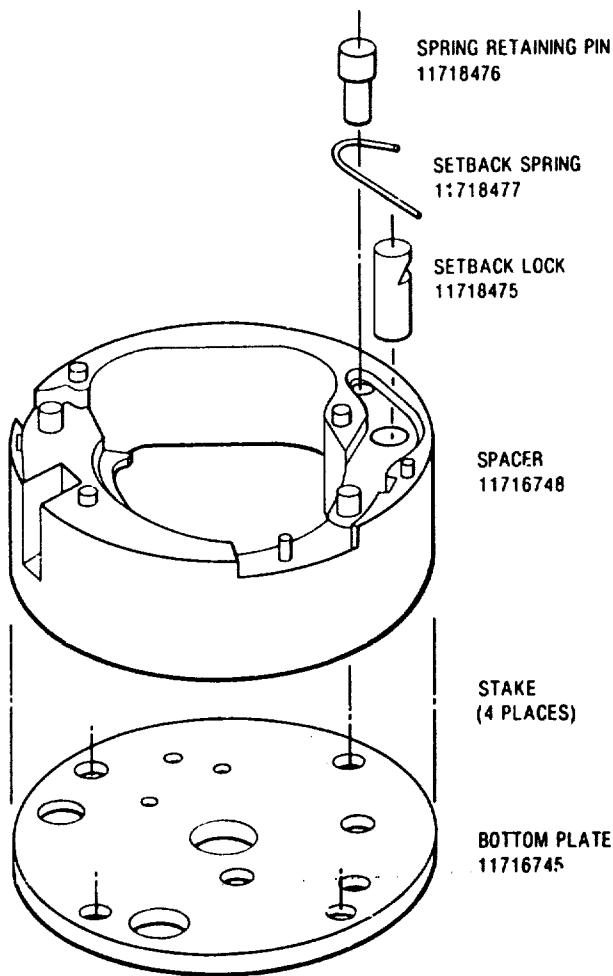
Bottom plate, spacer, and spring setback subassembly.
